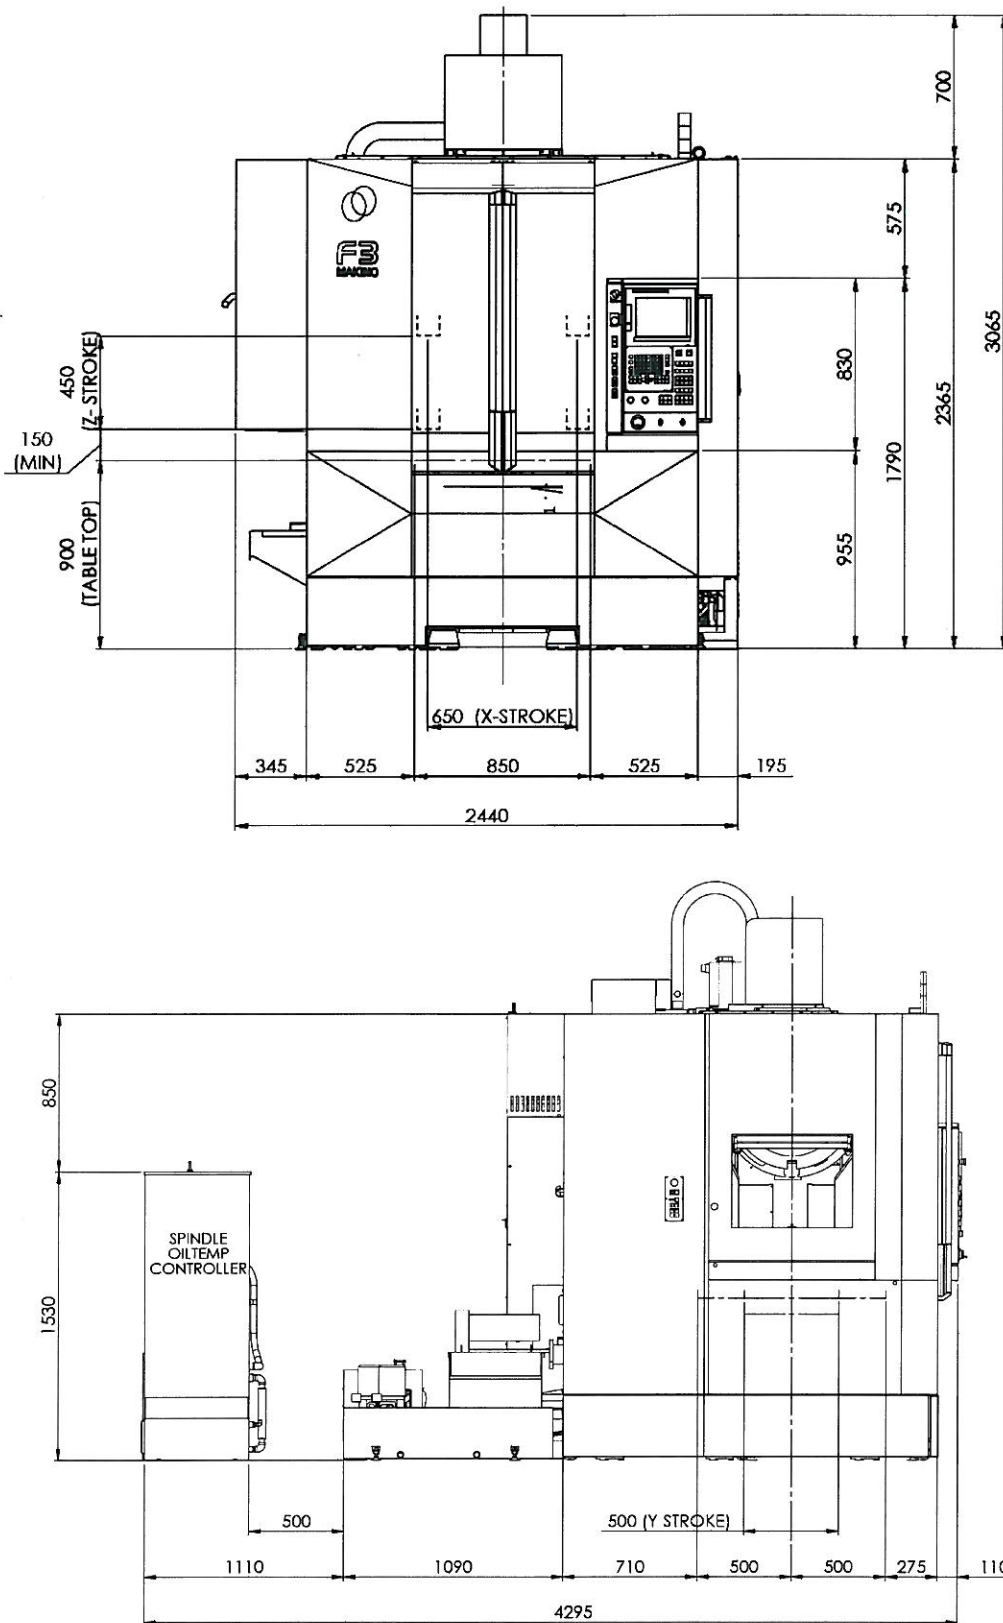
F3 Front and Side View (Rear Tank)
